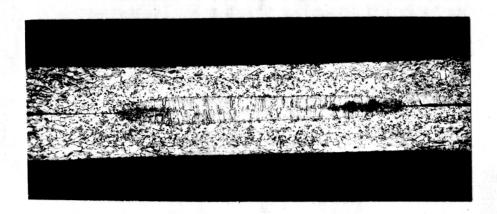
Cross-sectional view thru the centerline of spot weld No. 4 (see Figure 1). The load was applied to the top sheet and directed to the right. Radiographic inspection detected a slight indication of a crack.
